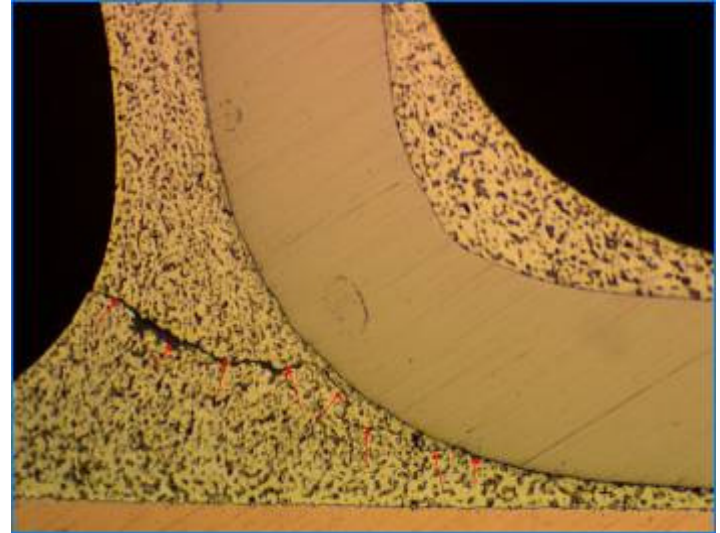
cross section, SN61, U62, right lead, solder crack, 200x
